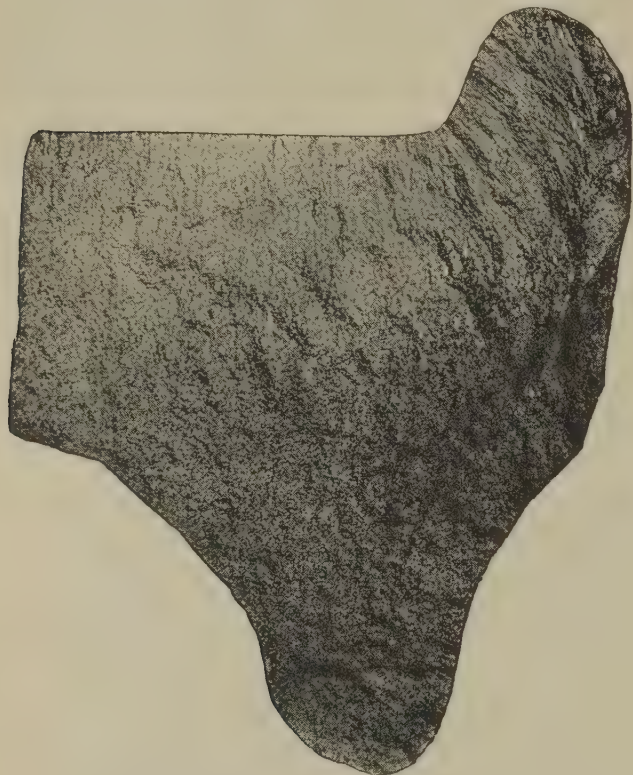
SECTION OF WHEEL CAST IN CONTRACTING CHILL.
